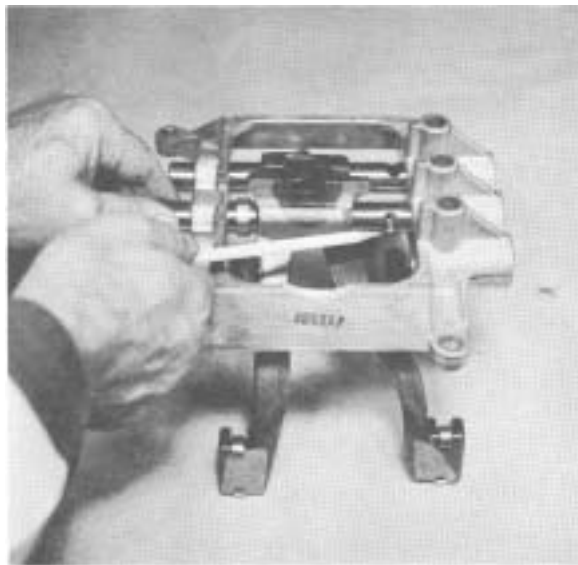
Install 2nd & 3rd shift rod through shift support. Install over shift spacer, shift fork and interlock cross pin.
